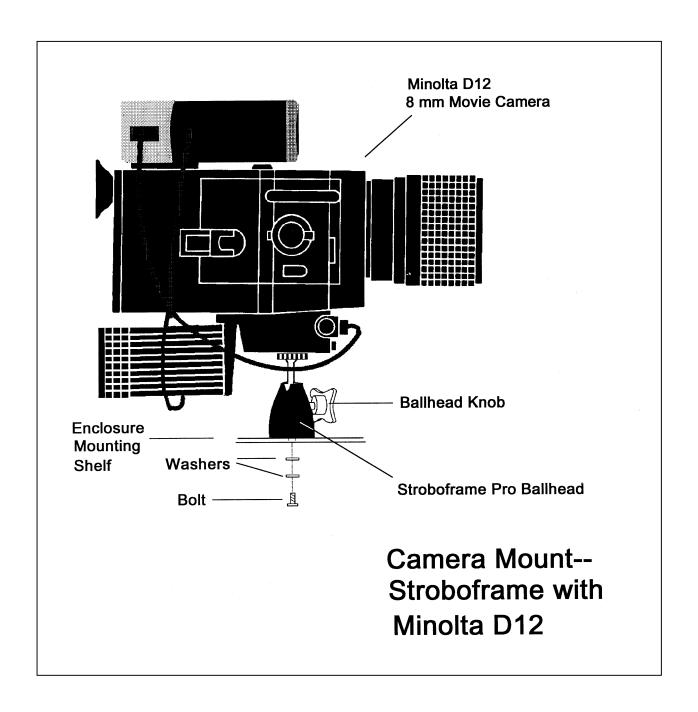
Automatic 8 mm Camera System Tripod Assembly.
